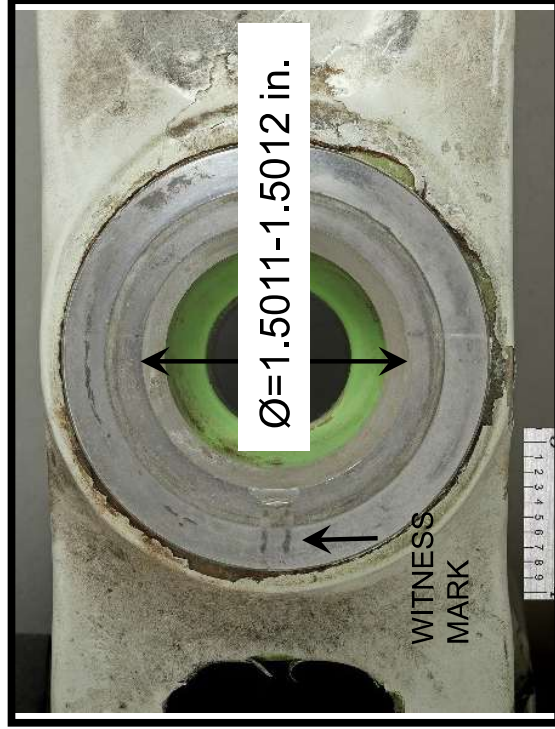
Overall view of Lower Drag Strut- Tee Bolt Bore Diameter.
